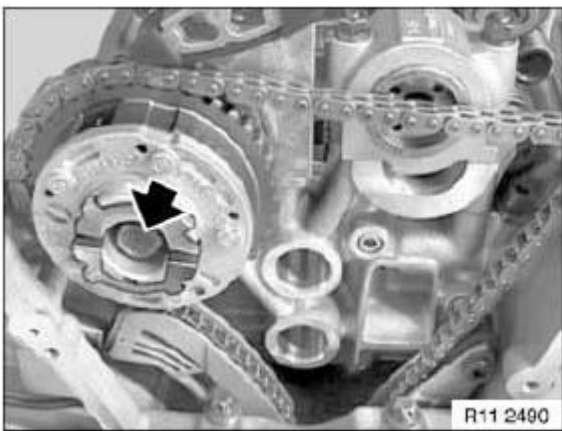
Identifying Exhaust Adjustment Unit Screw
